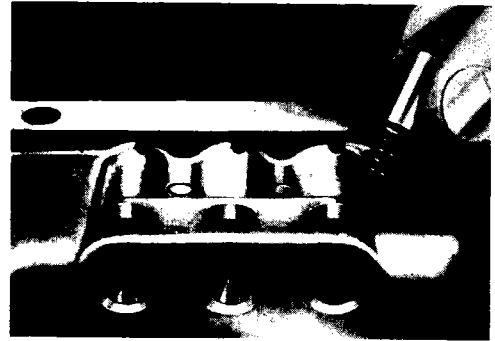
Inserting 1st/2nd speed selector shaft showing interlock plunger at position (a)
